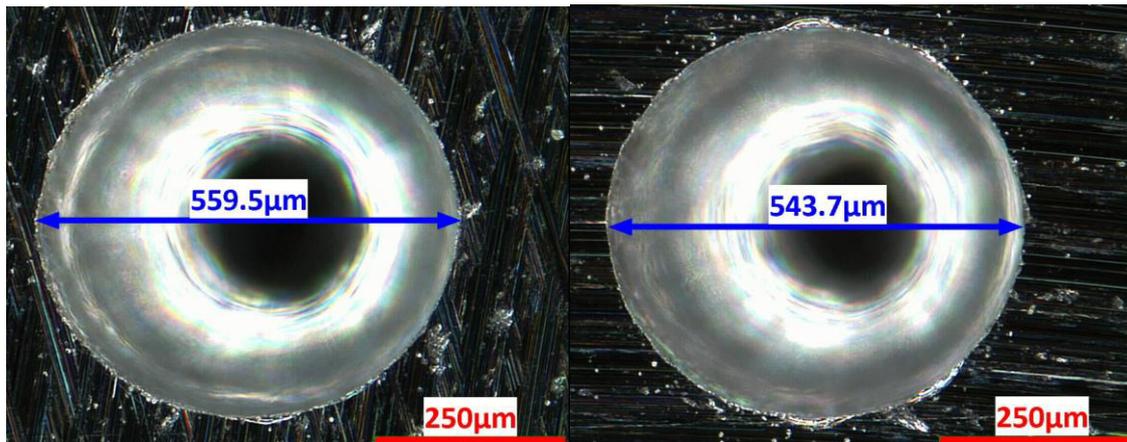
Measure of the major axis (M) a) Micro-cavity performed using X-axis machining (left) and performed using Y-axis machining (right).
